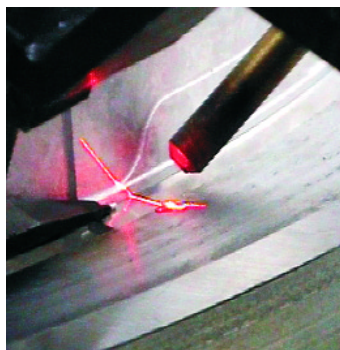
Automatic guidance of the laser beam in welding components, such as air intakes
